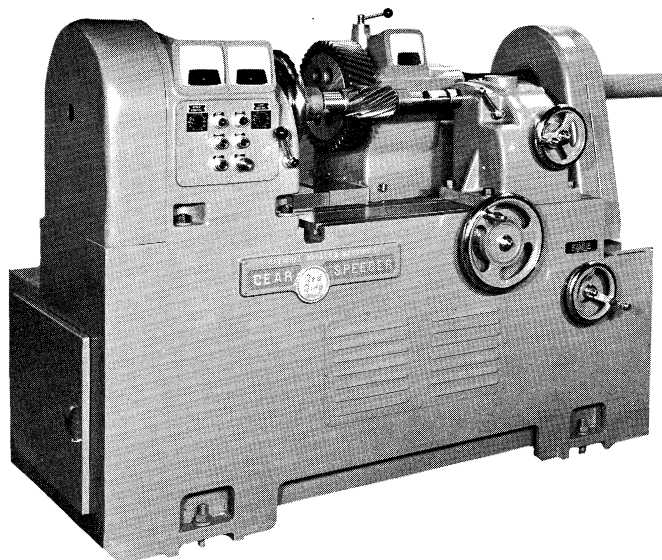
Model GSS-24 in. tester for external gears has indicators for both speed and torque.
